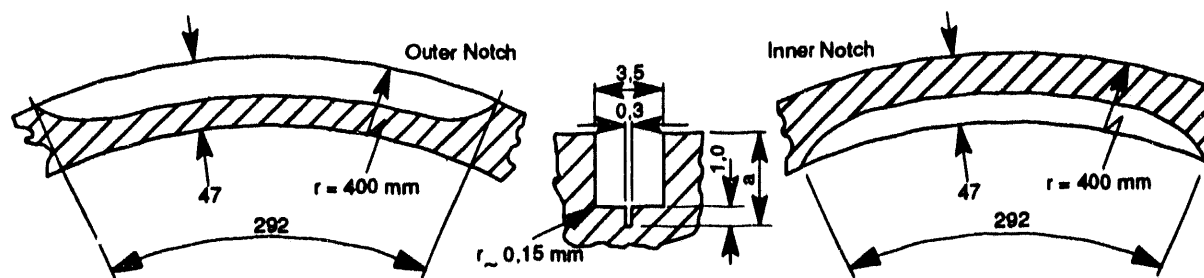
Example of Spark – eroded Starter Crack (Electric Discharge Machining)
